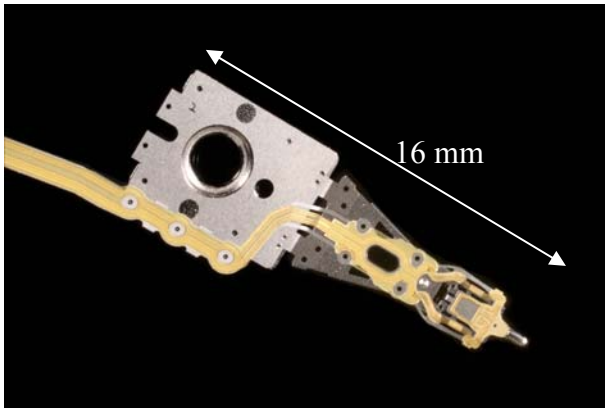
An example of a wiring-integrated suspension head assembly (Courtesy of Hutchinson Technology Inc, MN, USA)
